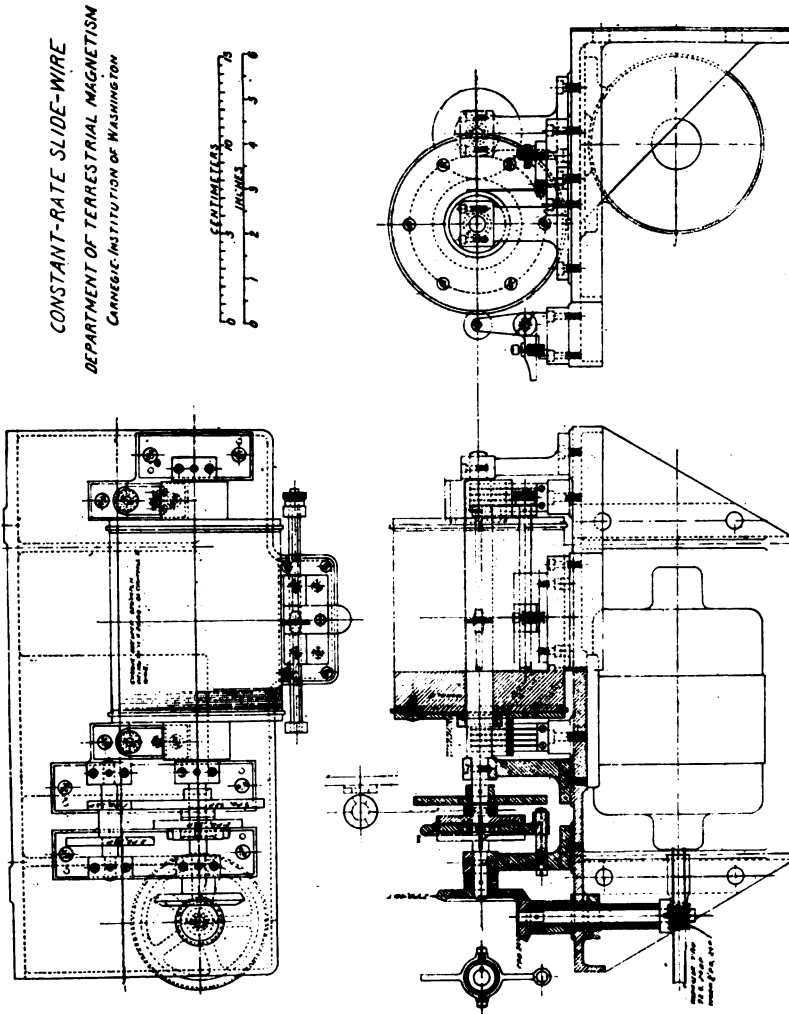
Plan and Elevations, Constant-Rate-Slide-Wire
